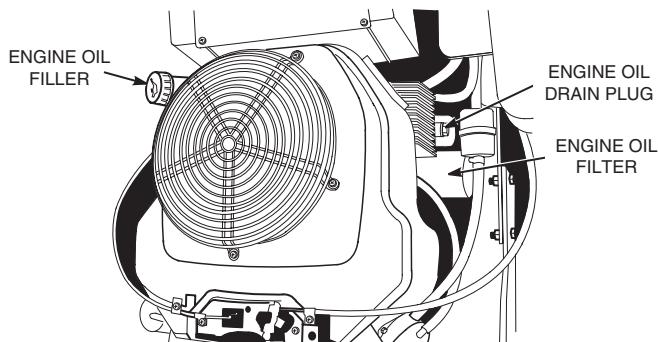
Kohler / Kawasaki Engine Oil Fill/Dipstick, Filter and Drain Locations
